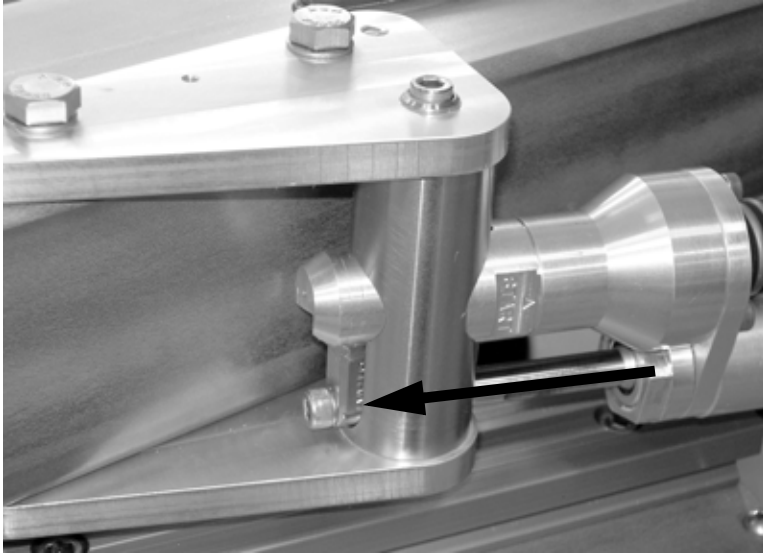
When you push the wire to deflect it, the actuator rod will extend.
